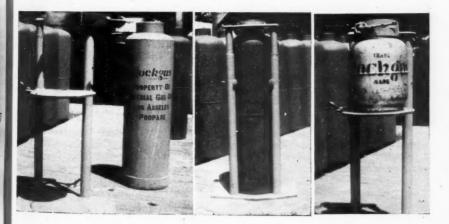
This shows several views of a cylinder holder built by Durwood Hutchinson, Mountain View, Calif. At left is the adjustable sliding plate which holds the bottom of the cylinder. Above it is the emergency brake hand holder. In the center is a 11 x 50-in. cylinder firmly secured. At right is a 11 x 17-in. cylinder in proper position for inserting valves.
